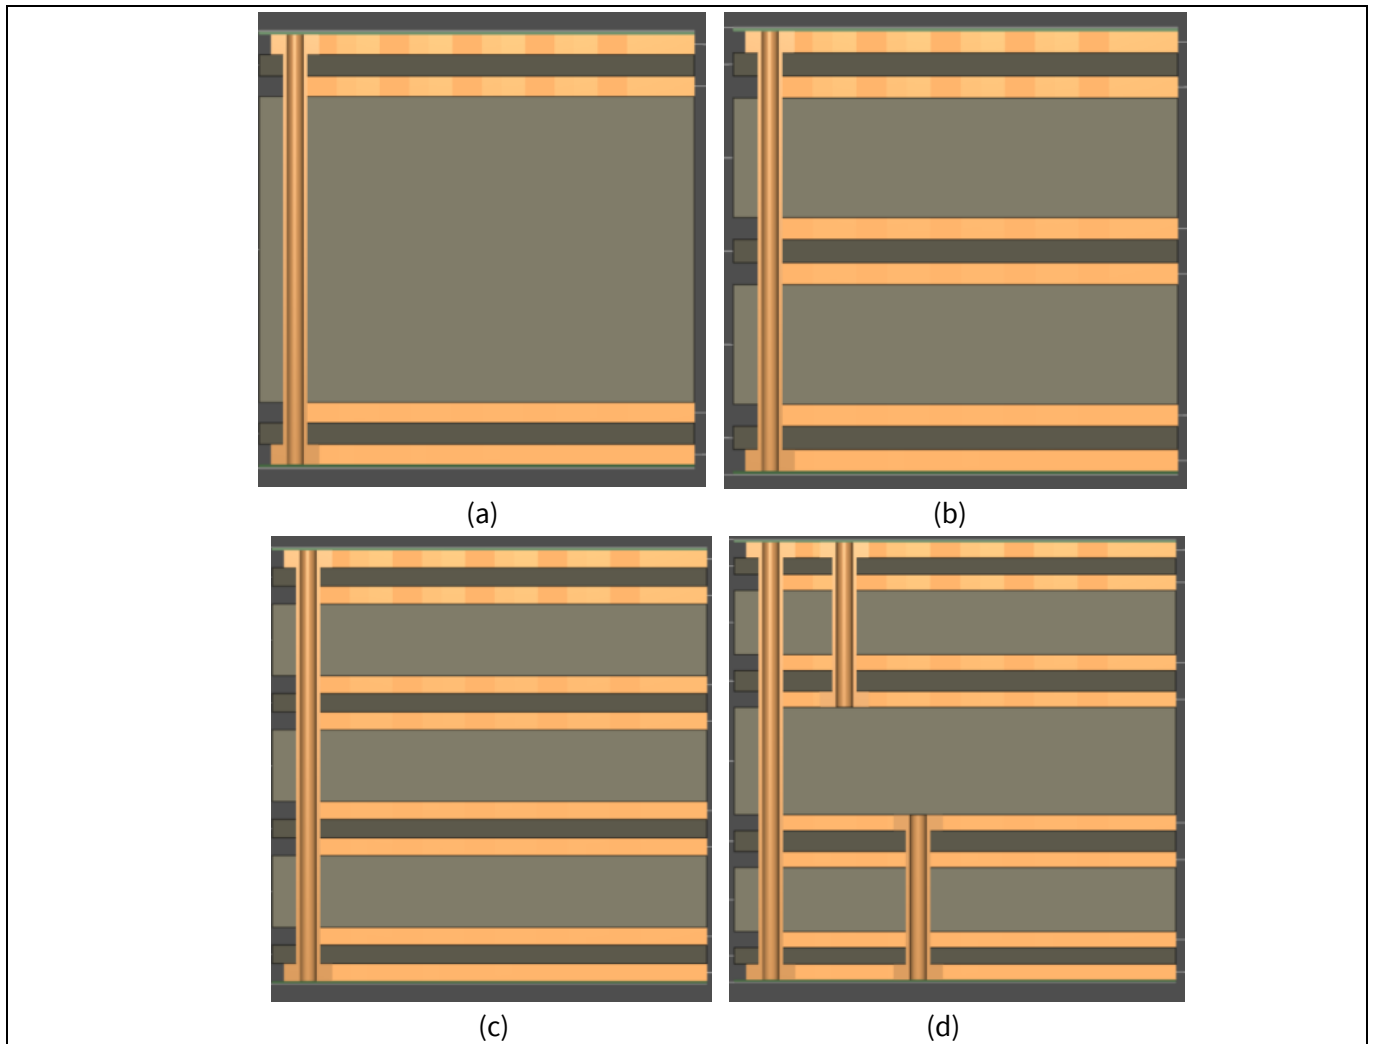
(a) 4-layer stack-up; (b) 6-layer stack-up; (c) 8-layer stack-up with only through-hole vias; (d) 8-layer stack-up with through-hole and blind vias
